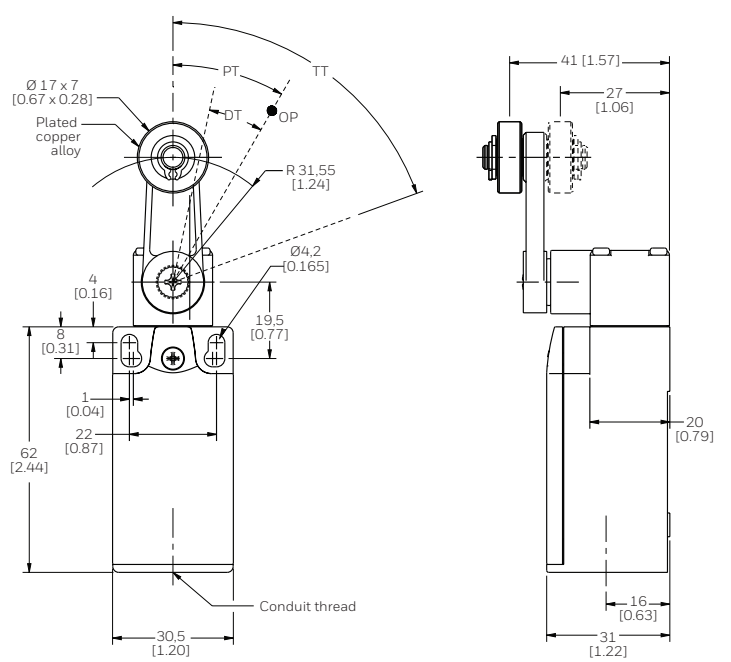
GLL Side Rotary (A2B) with Adj. Lever Dimensions
